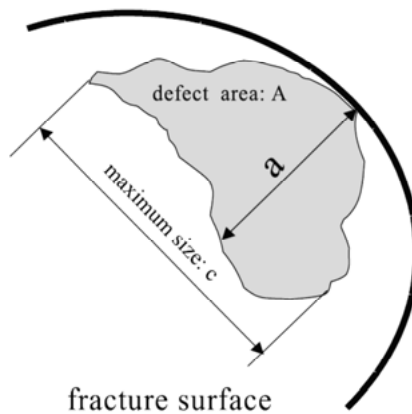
Illustration of a casting defect and the dimensions on the fracture surface [13].
